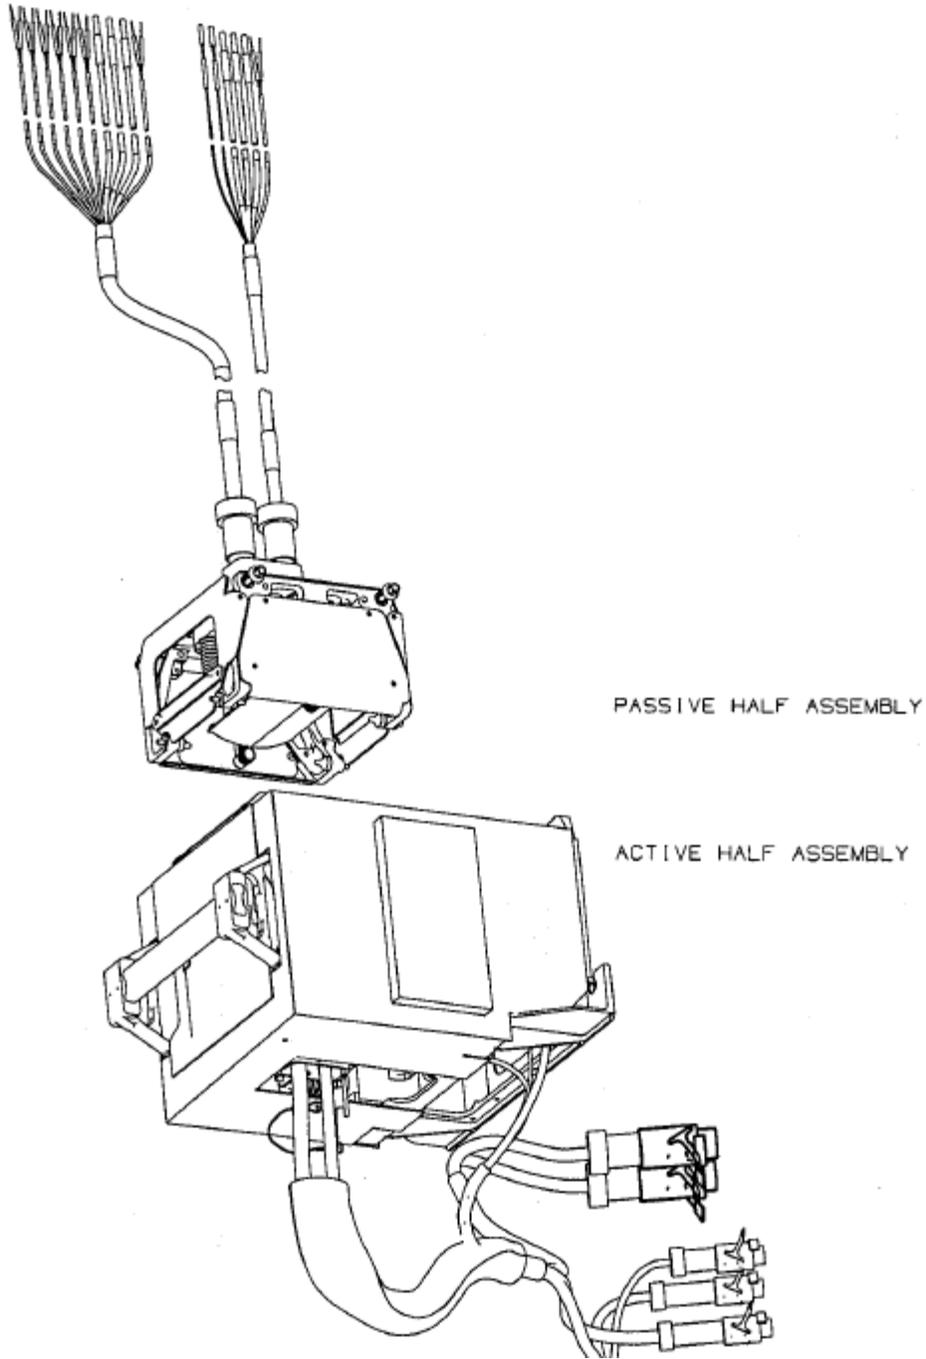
UMBILICAL MECHANISM ASSEMBLY
